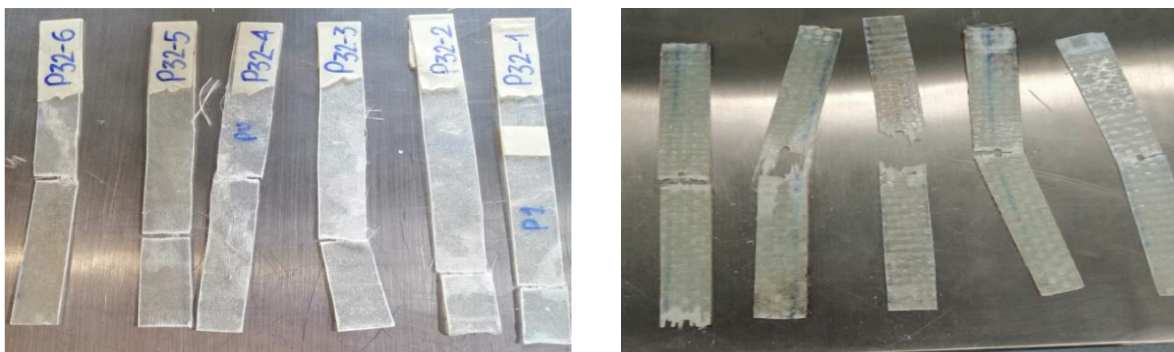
Specimens for tensile tests and open hole tests under ASTM D3039 and ASTM D5766.
